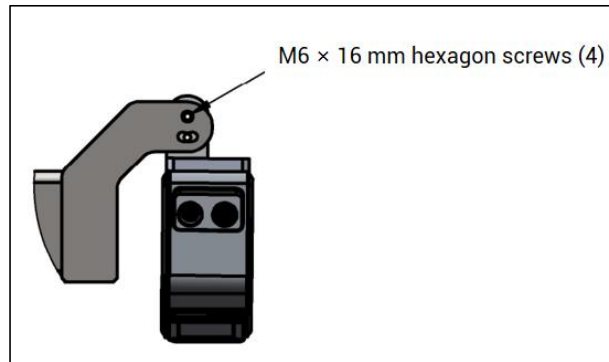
Fasten the Profiler mounting plate to the welded I-beam end
